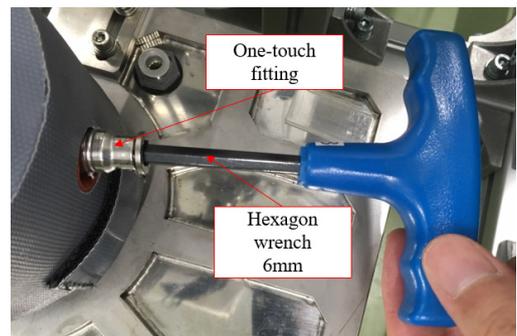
Remove the gas cell fitting (on the receiver unit side) with a hexagon wrench (6mm).
